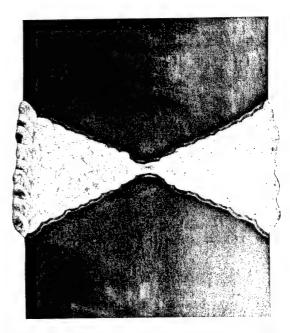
Completed double-U weld joint in 5-inch 2219—T81 aluminum alloy plate after approximately 50 passes on each side of joint.
